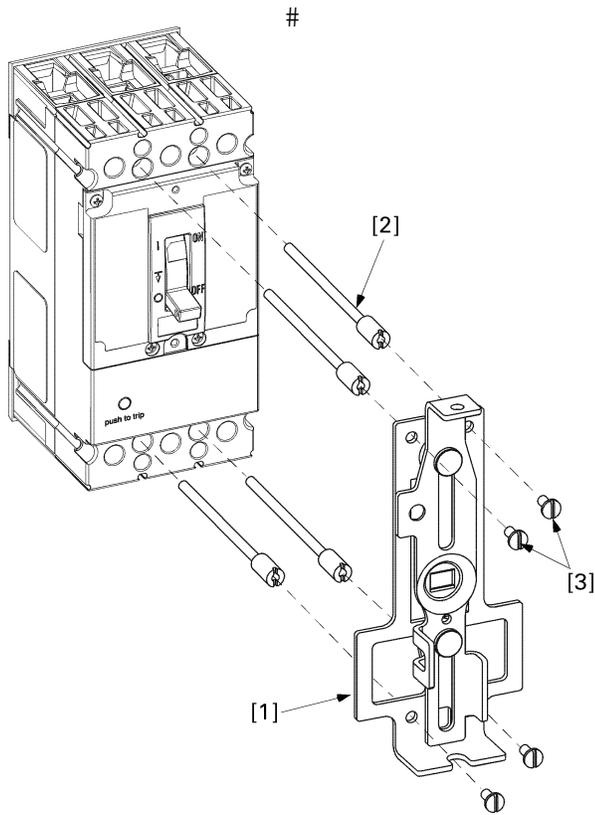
Installing the circuit breaker operating mechanism on the FC breaker.
